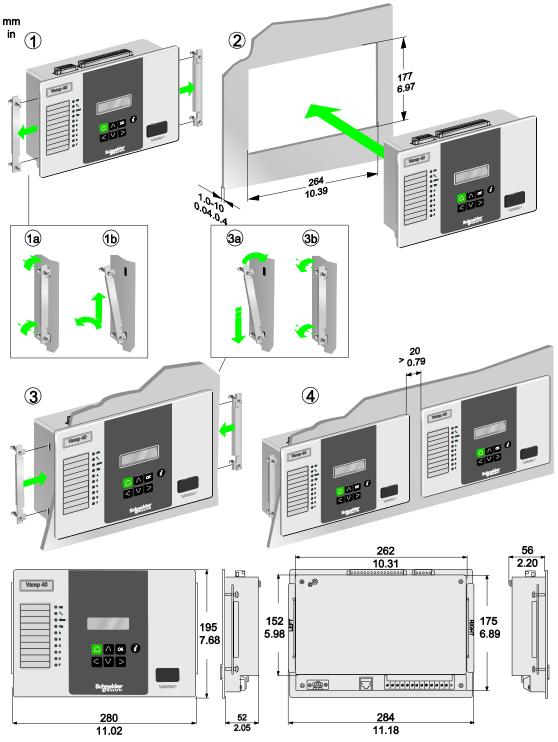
Panel cut-out dimensions and Dimensional drawing
